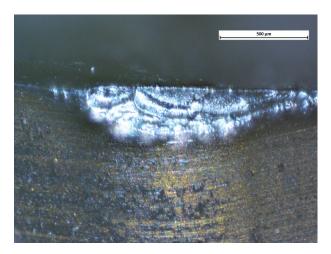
Surface morphology of worn cutting insert investigated with optical microscope Nikon Eclipse LV100ND (50x).
